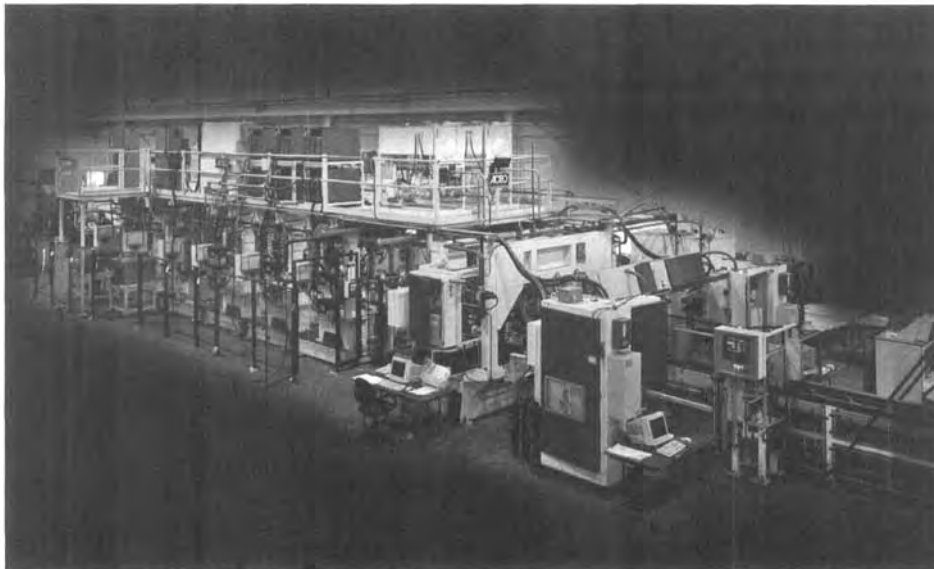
F3b-1 A special machine for the automatic assembly and welding of rear axle assemblies for pick-up trucks. (Courtesy Acro Automation Systems, Inc.)
